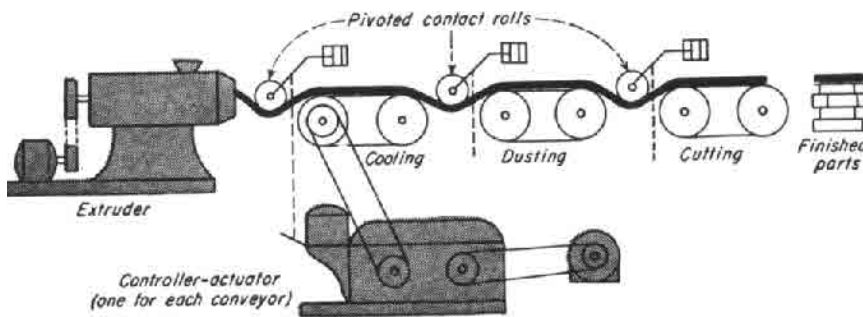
Dimension control of extruded materials calls for primary indicators like the contact rolls shown. Their movements actuate conveyor control mechanisms.
